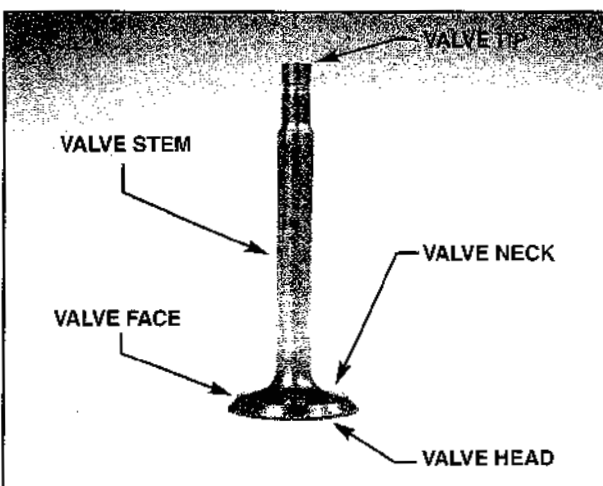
The basic components of a poppet valve include the valve head, valve face, valve neck, valve stem, and valve tip.
